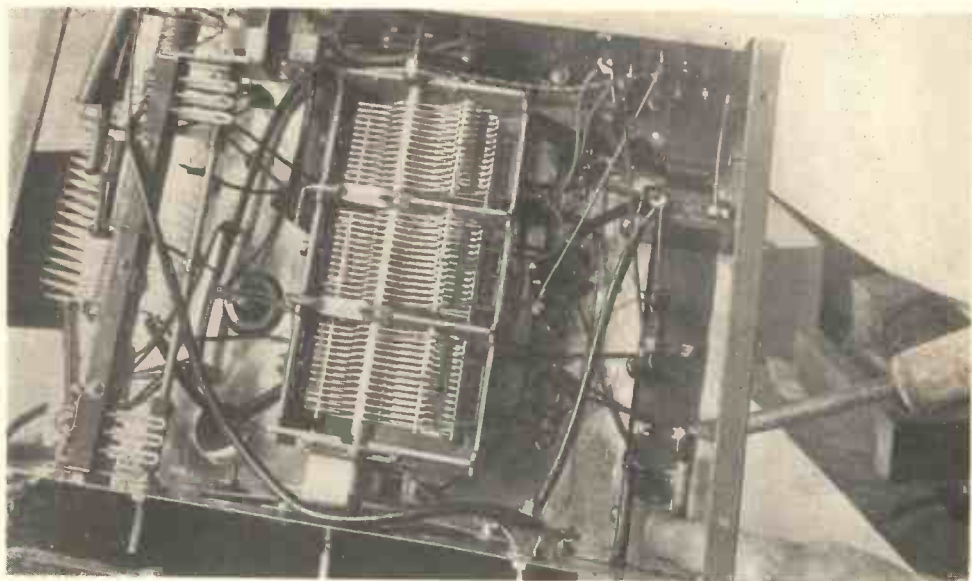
COMPLETE VIEW OF THE UNDERSIDE OF THE CHASSIS.
